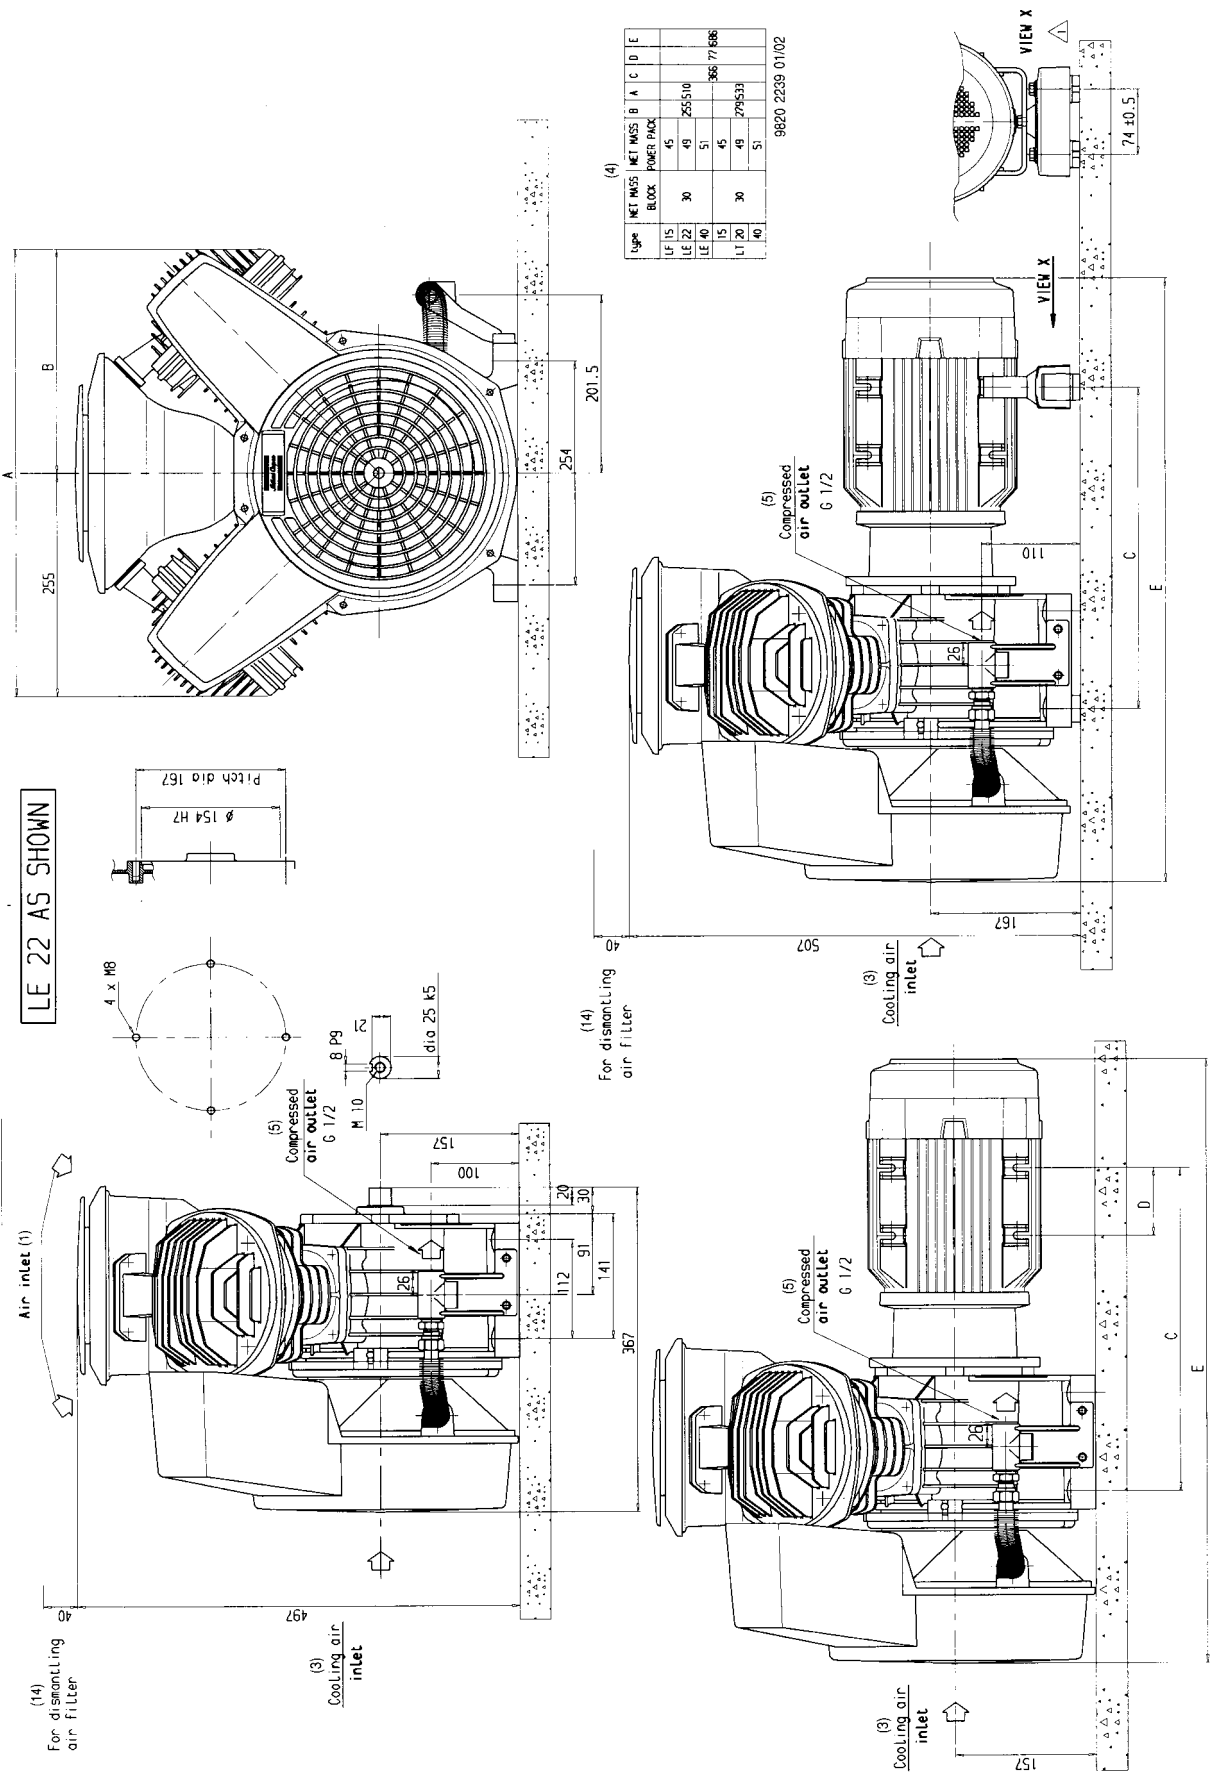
Dimension drawing, LE/LT15 up to -40 and LF15/22 Power Pack
